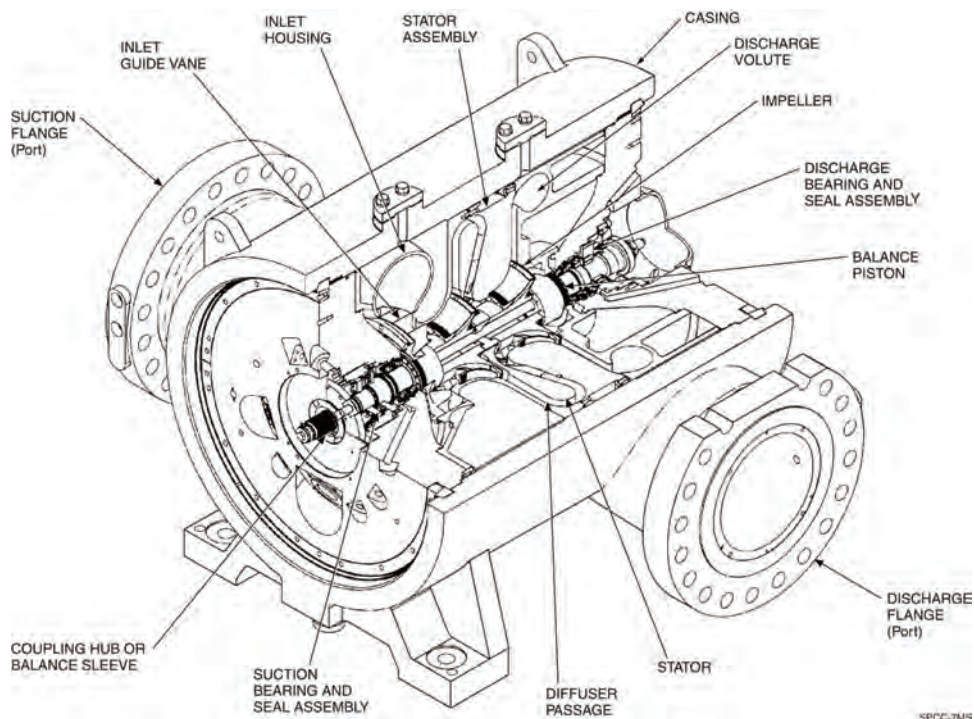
Typical centrifugal compressor design (courtesy of Solar Turbines Incorporated).
